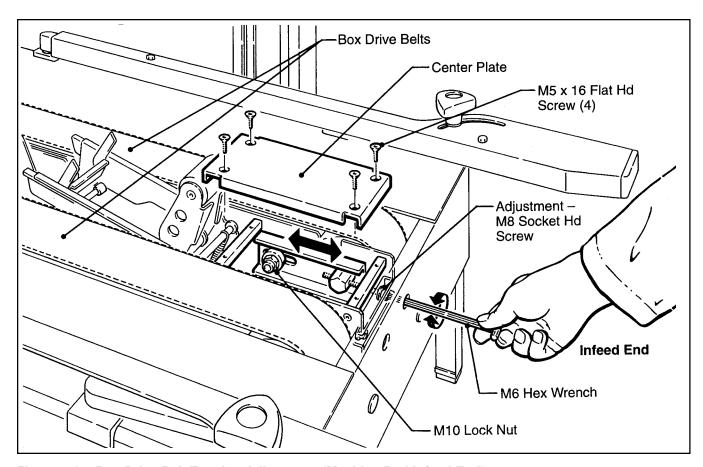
Box Drive Belt Tension Adjustment (Machine Bed Infeed End)
